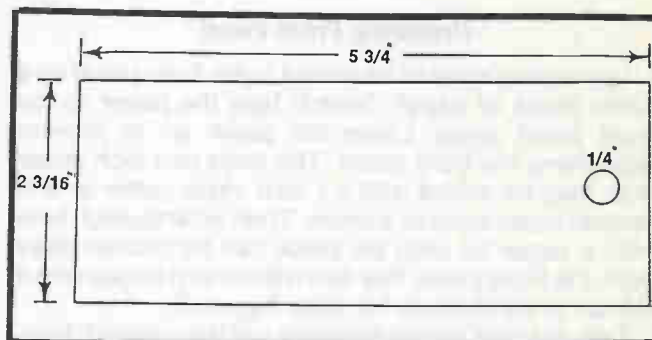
Cut the $5 \frac{3}{4} \times 2 \frac{3}{16}$ inch piece from a larger perboard. Drill a $\frac{1}{4}$ inch hole to let the AC cord through.
